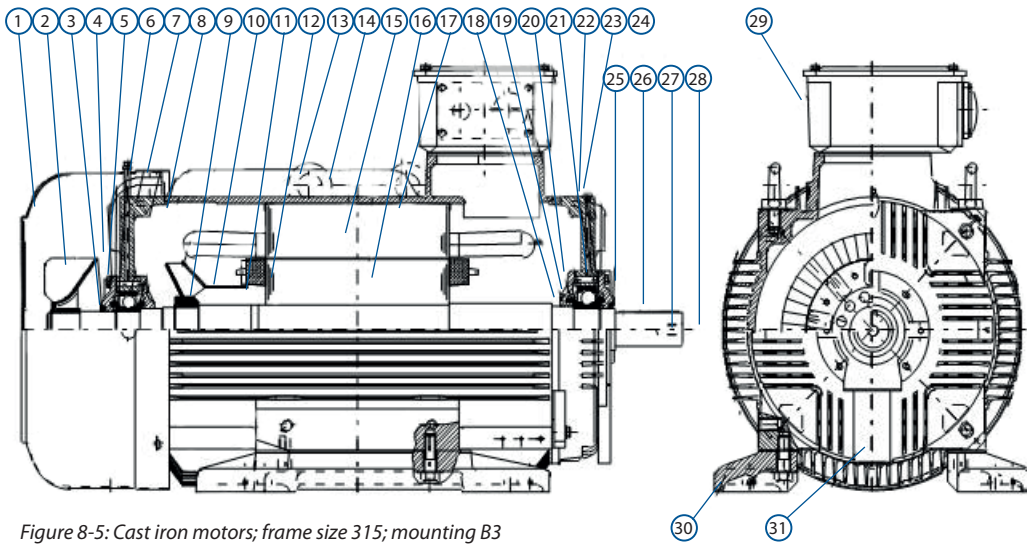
Cast iron motors; frame size 315; mounting B3
